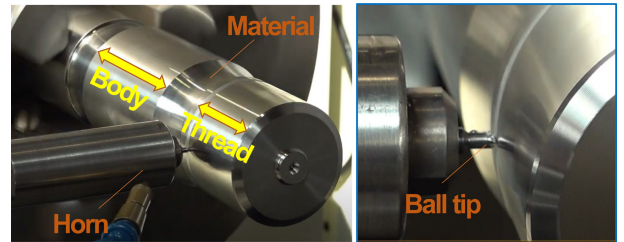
UNSM treatment for pre-machined material before screw rolling
